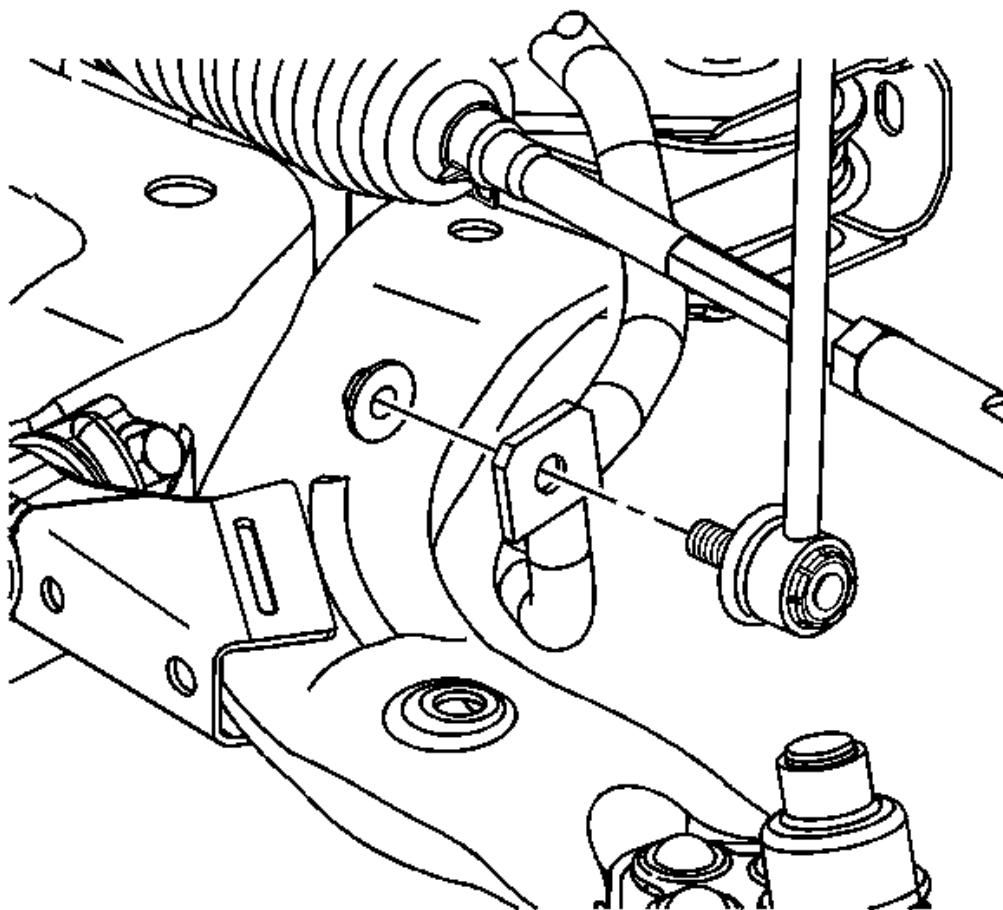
View Of Stabilizer Link At Stabilizer Shaft
